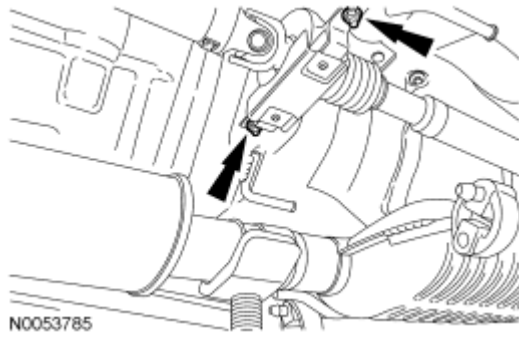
Lowering Exhaust System To Allow Clearance For Removal Of Driveshaft
